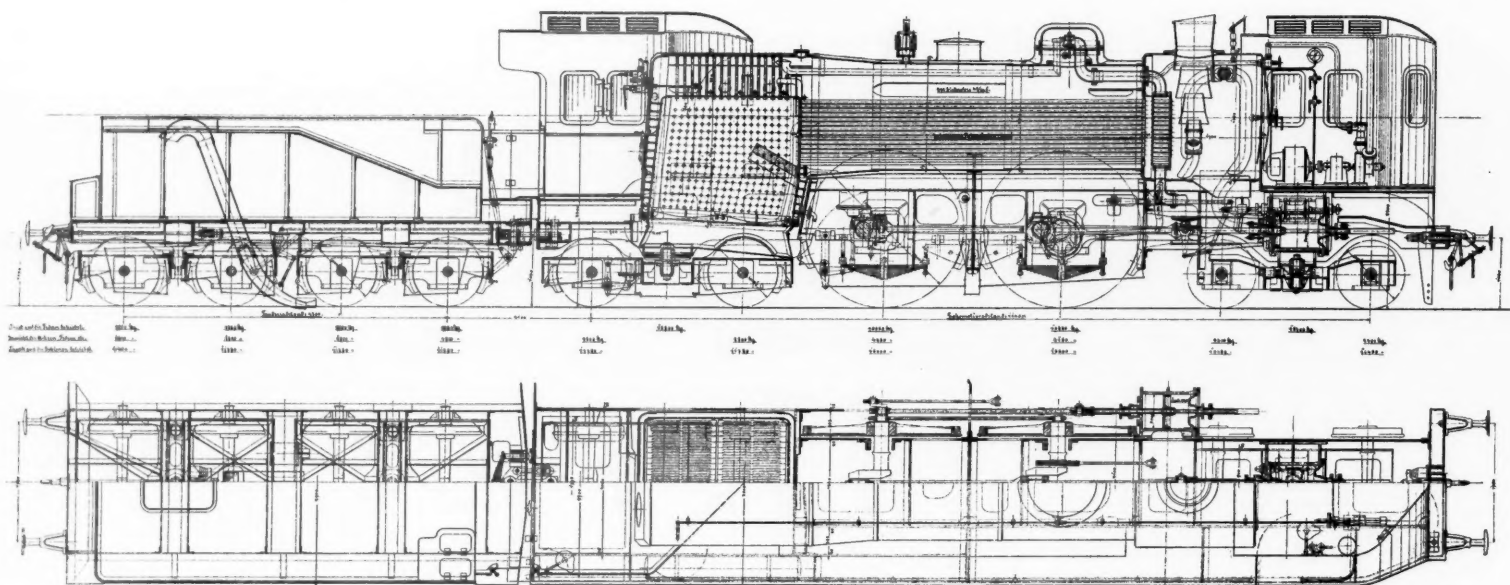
Three-Cylinder Compound Engine—Designed by Chief Engineer Kuhn.
